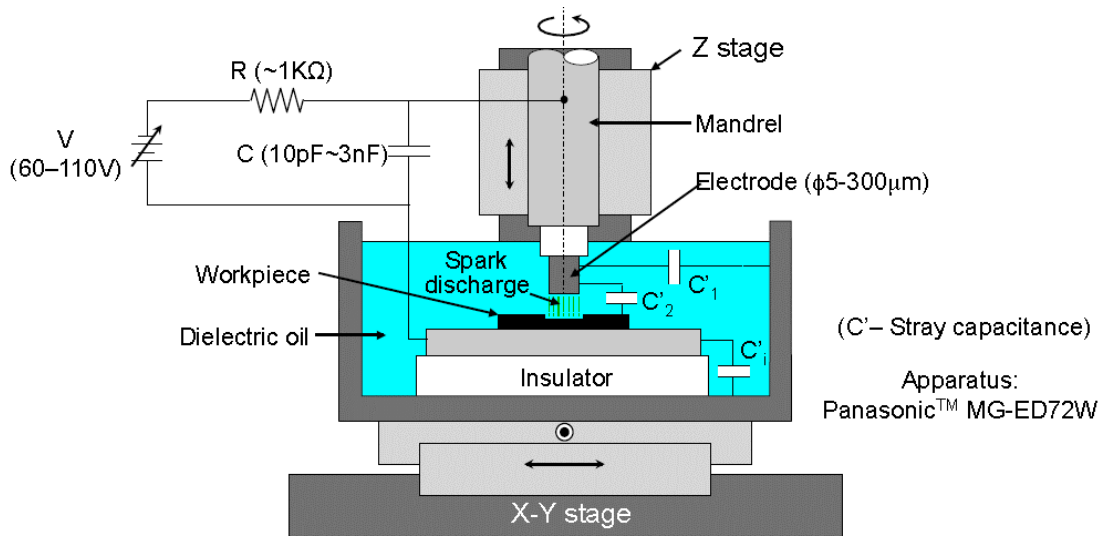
Schematic drawing of the basic setup of μ EDM unit [Tak02].
